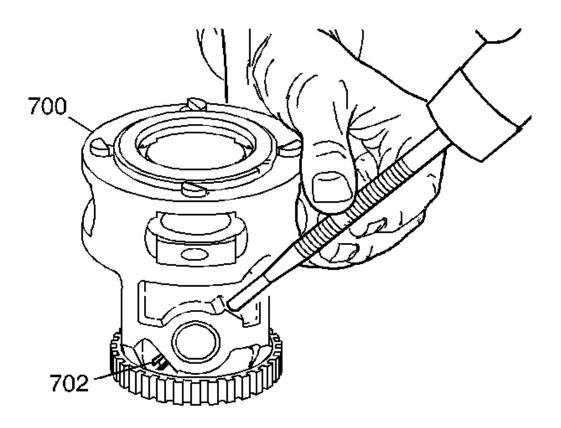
Removing Differential Pinion Gear Shaft Pin With Drift Punch Courtesy of GENERAL MOTORS CORP.
